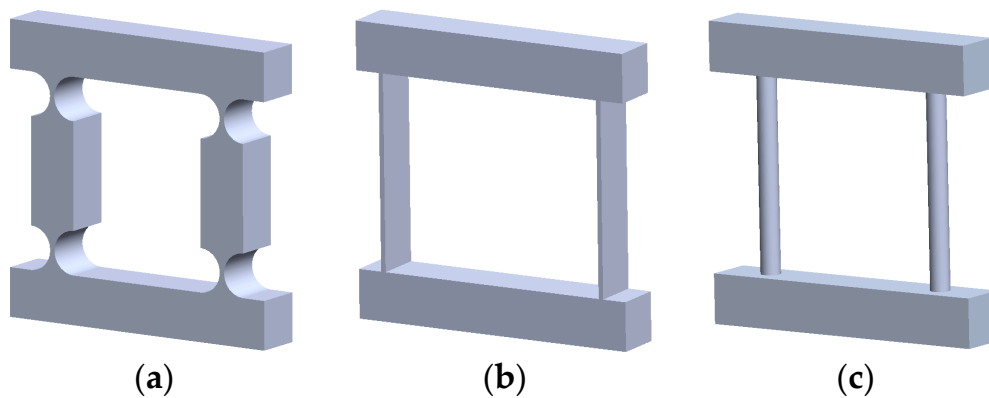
Types of compliant mechanisms with basic flexure hinges: (a) notch flexure hinges, (b) leaf springs joints, and (c) rod-shaped joints.
